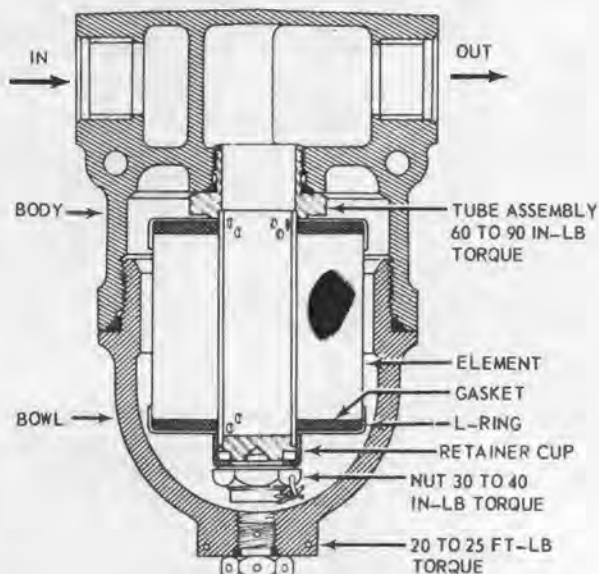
Fuel strainer cross-section — UH-1A thru Serial No. 58-3047
